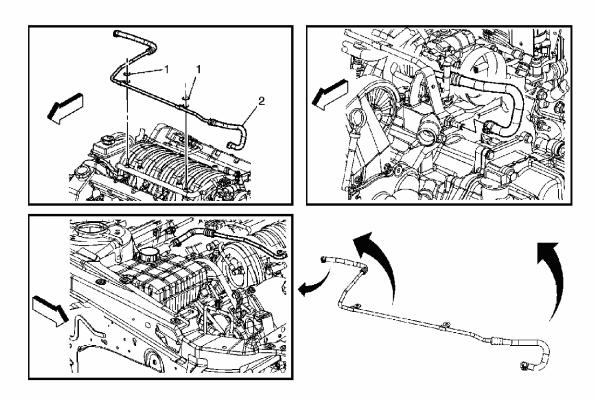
Identifying Radiator Surge Tank Inlet Hose/Pipe (LD8) Courtesy of GENERAL MOTORS CORP.
